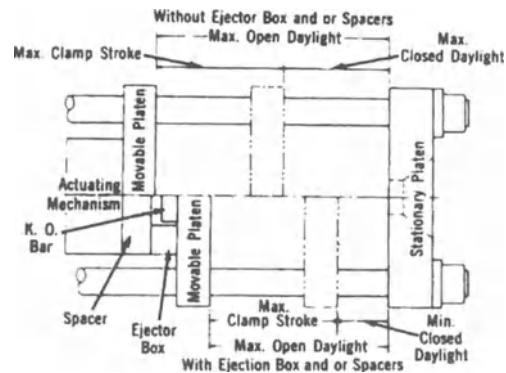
Schematic of clamping daylight opening. The upper and lower halves of the drawing show the maximum and minimum positions of the platens.
